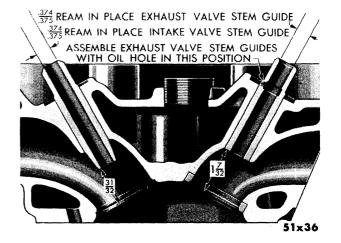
Exhaust and Intake Valve Gùides Installed In Head
